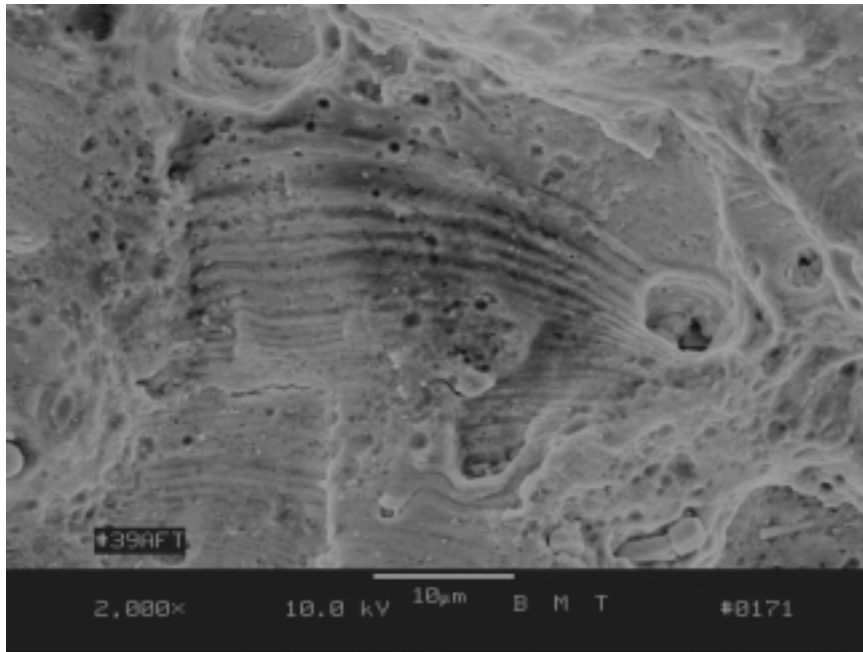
Scanning electron microscope photographs showing fatigue striations near the end of the flat profile fracture surface aft of Hole 39. Just beyond these regions, the fracture surface was dominated by a dimpled morphology, indicative of the fracture mechanism of micro-void coalescence, or ductile separation. Severe pitting due to corrosion can also be seen.
